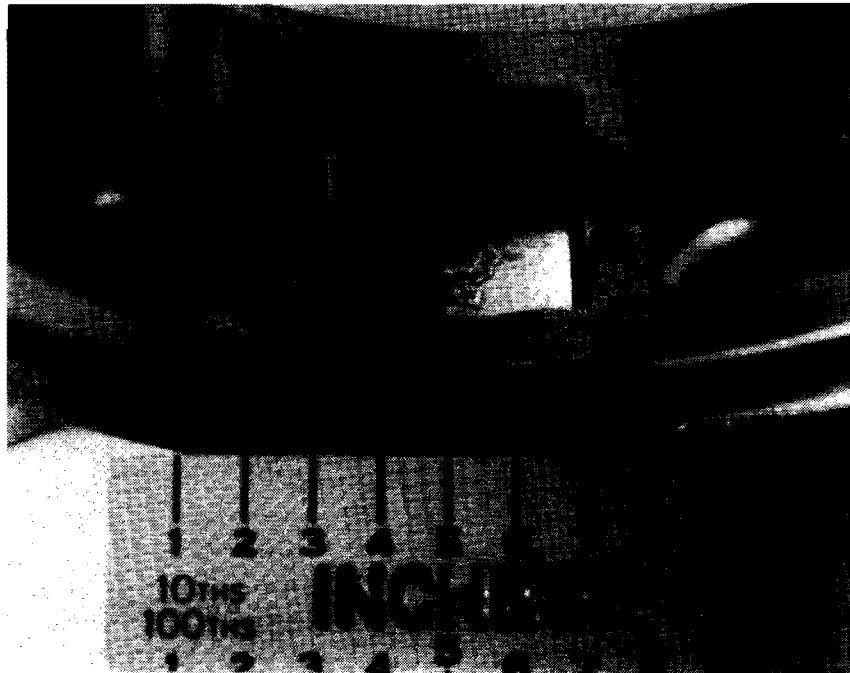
90-Degree Gearbox -466 Bearing Outer Race C/D,
